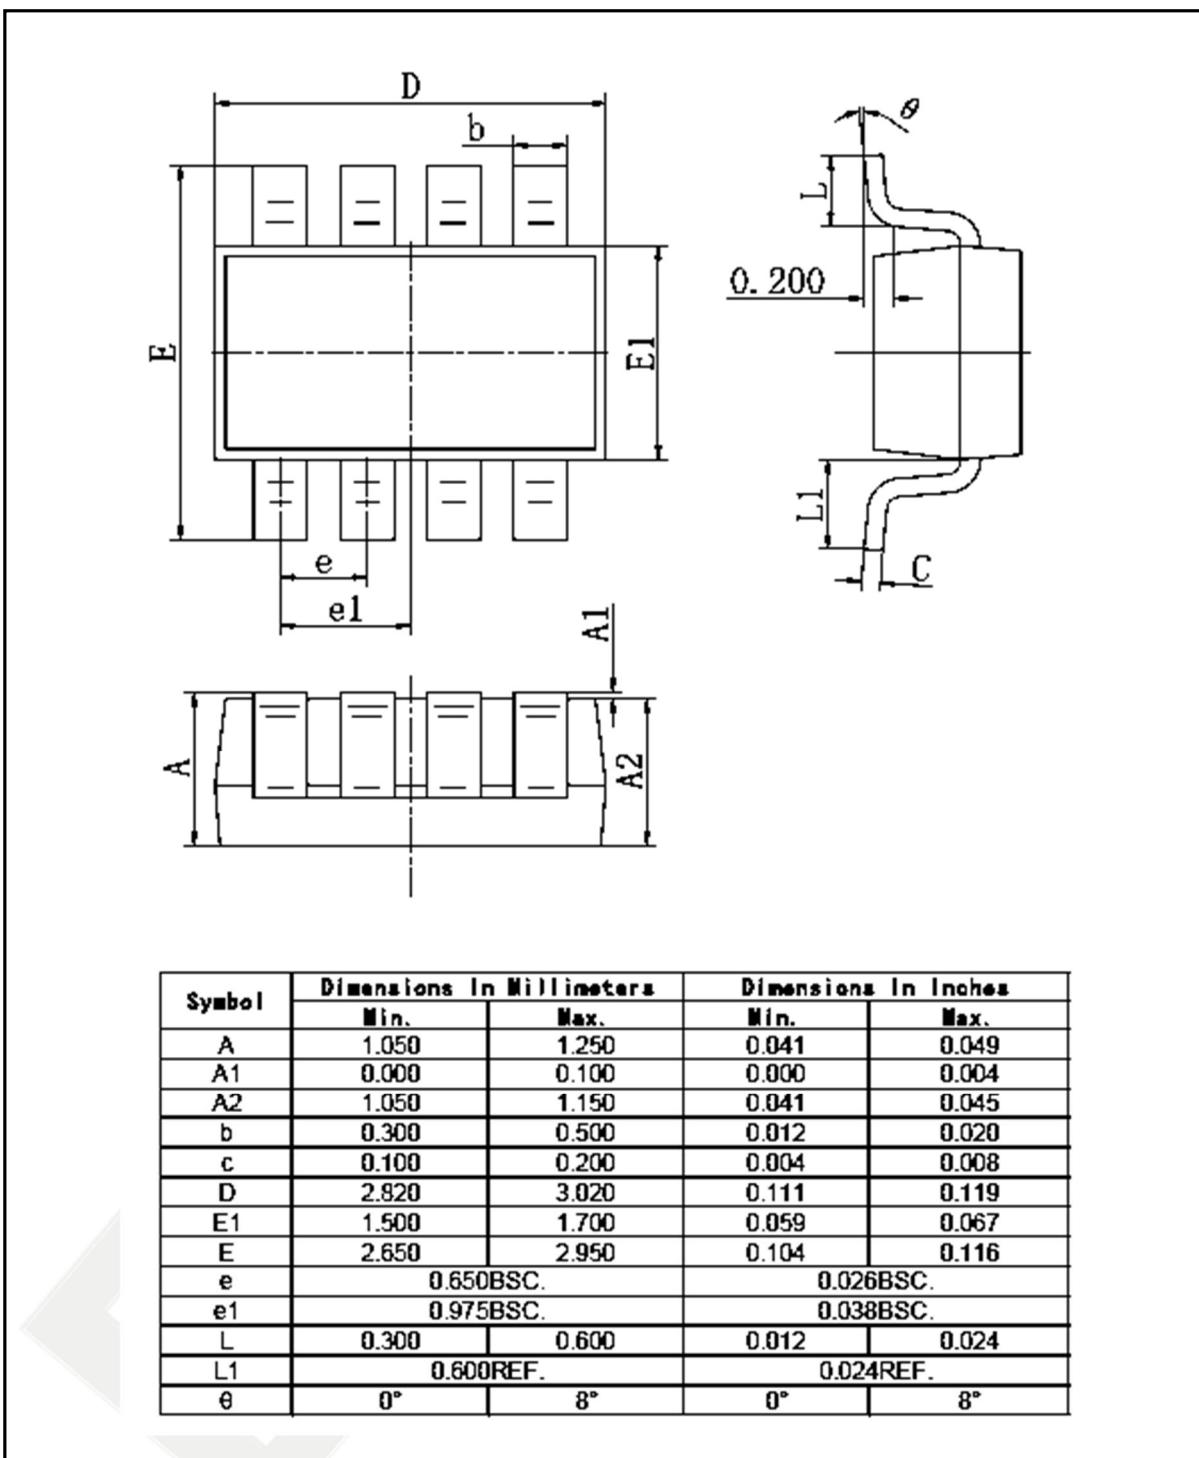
SOT23-8L Mechanical Data and Package Dimensions
